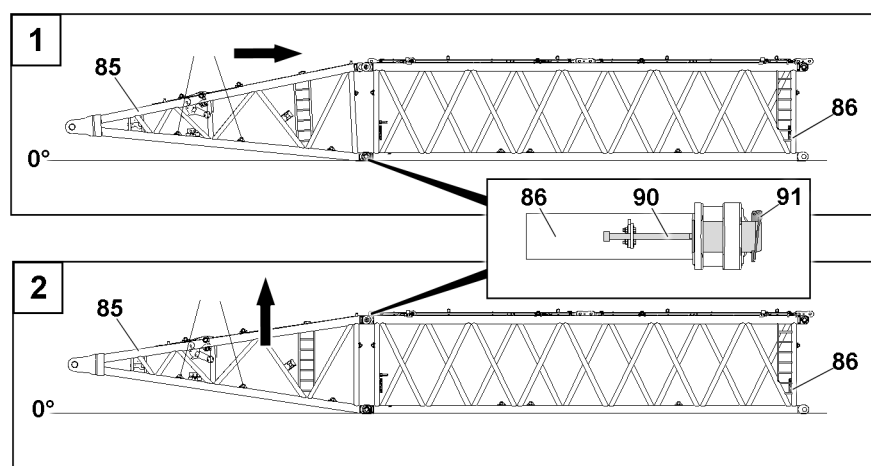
Assembling the W-pivot section, 12 m S-intermediate section
